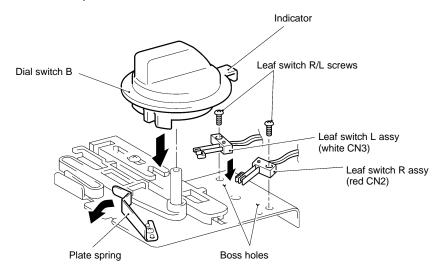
Reassembling the Dial Switch Holder Assy B (4)
